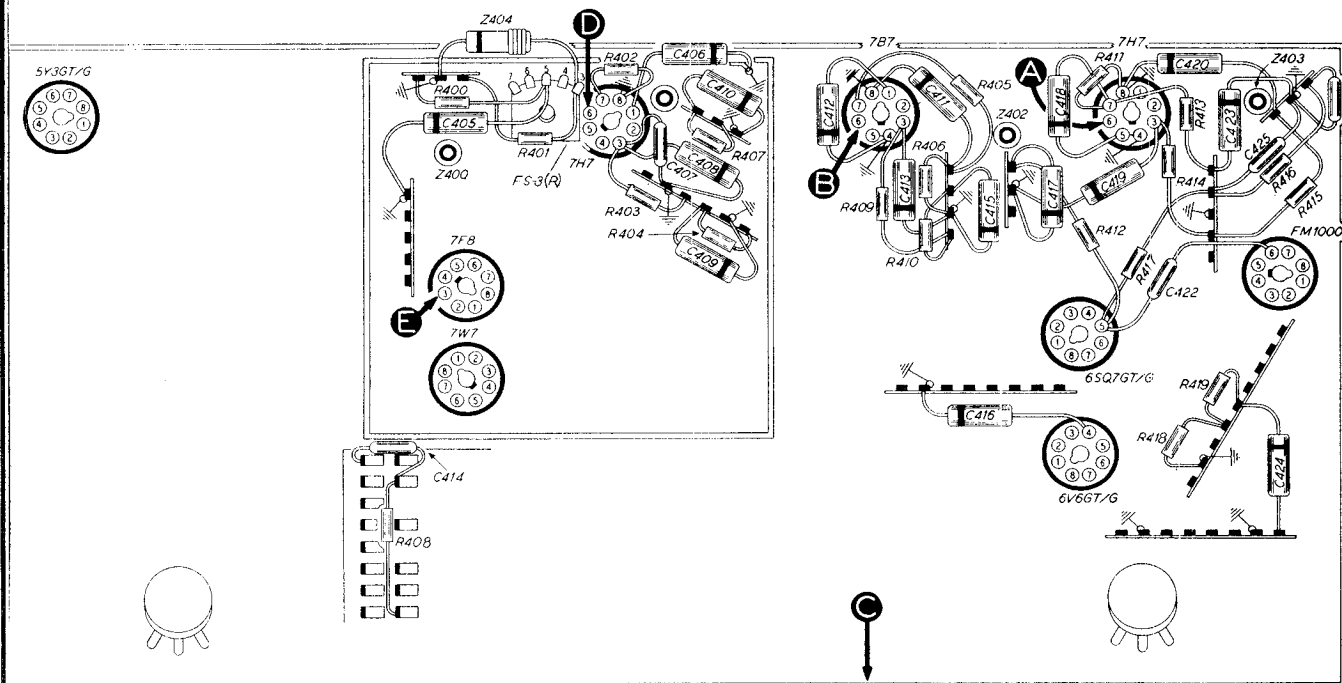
BOTTOM VIEW, SHOWING SECTION 4 TEST POINTS.
